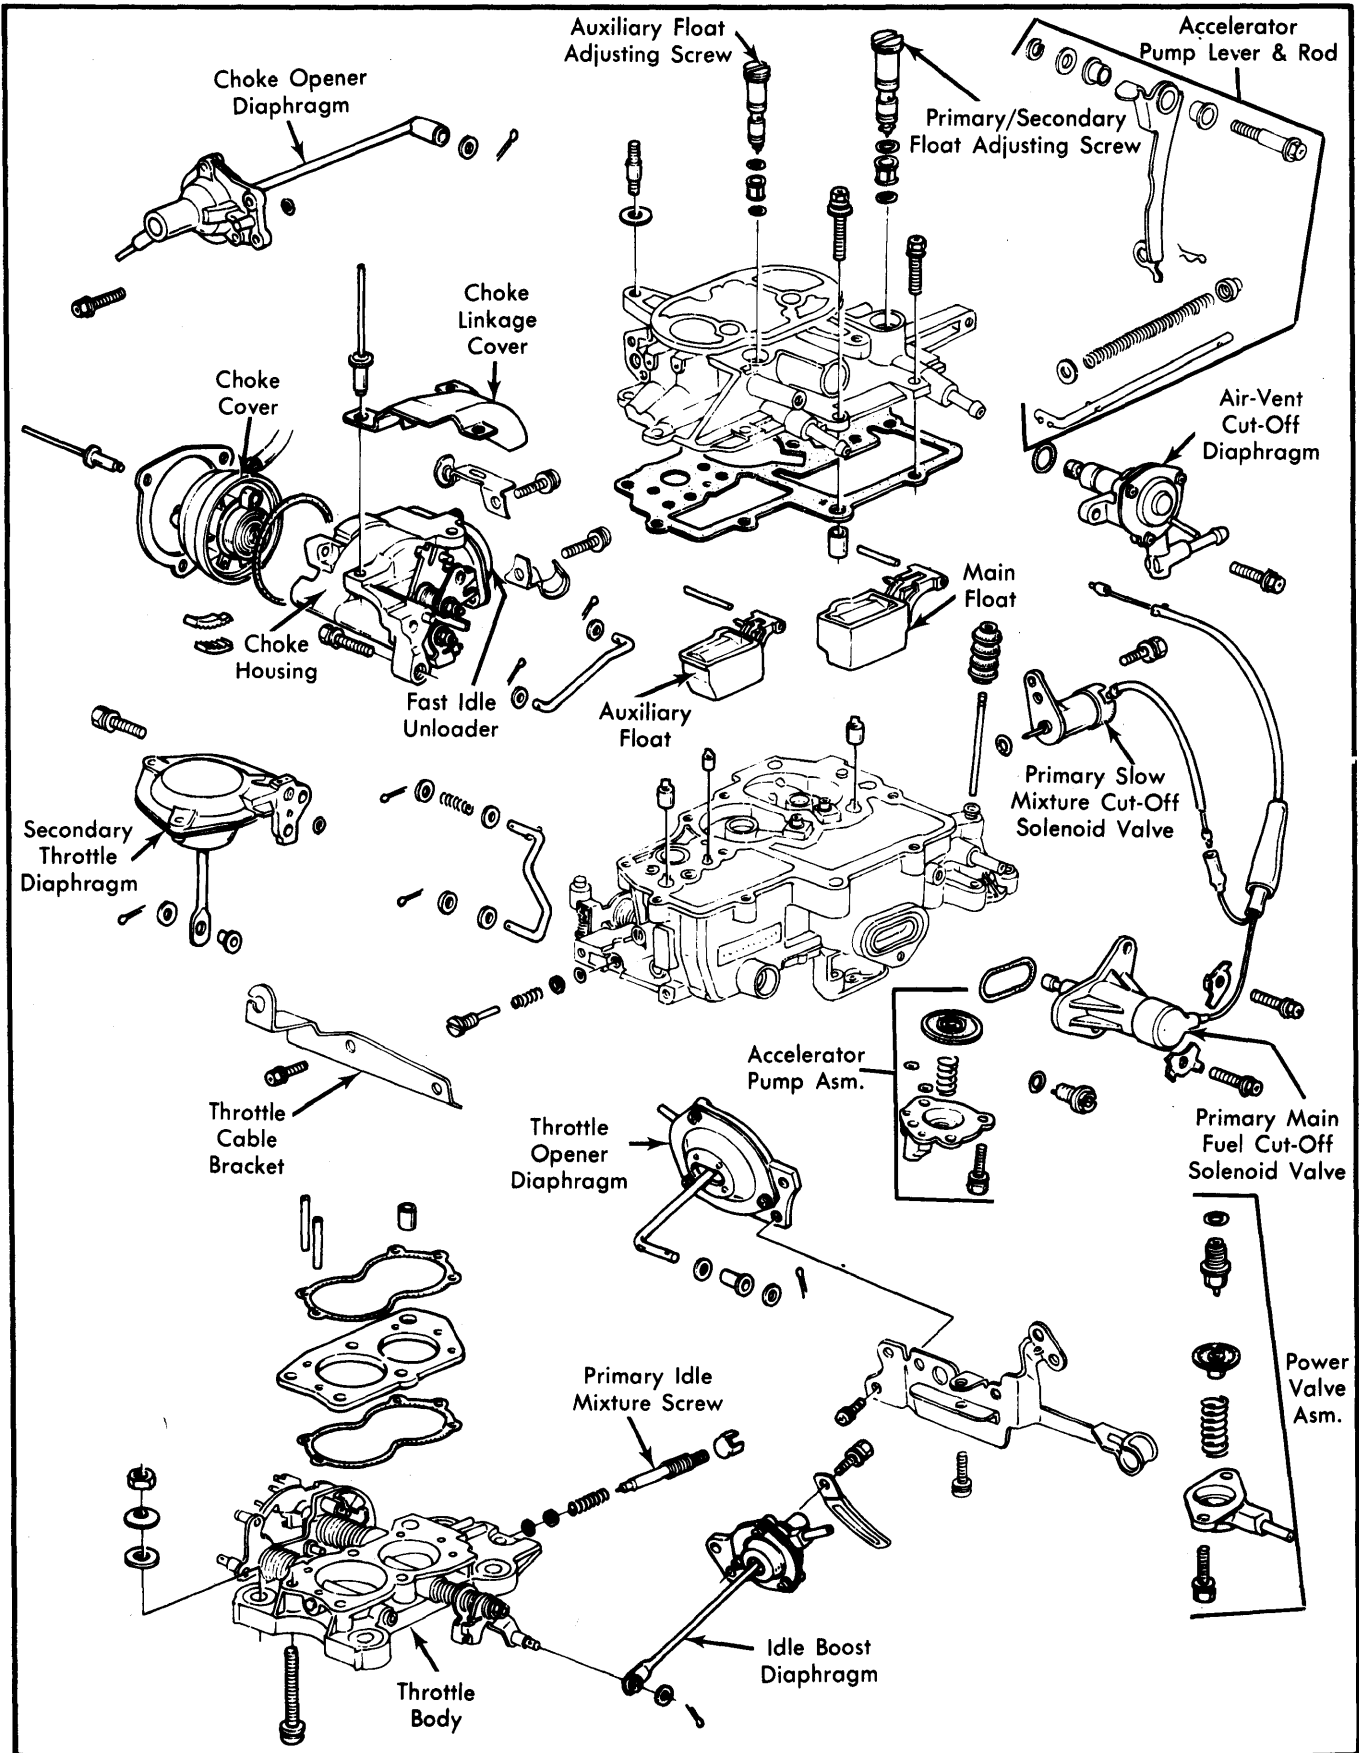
Exploded View of Keihin 2-Bbl. Carburetor
